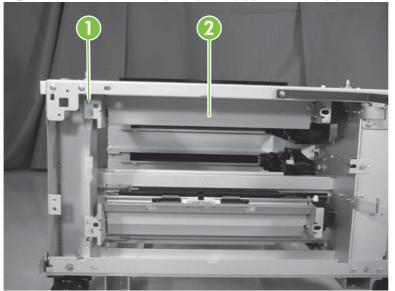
Remove the pickup unit (upper cassette) (3 of 3)
